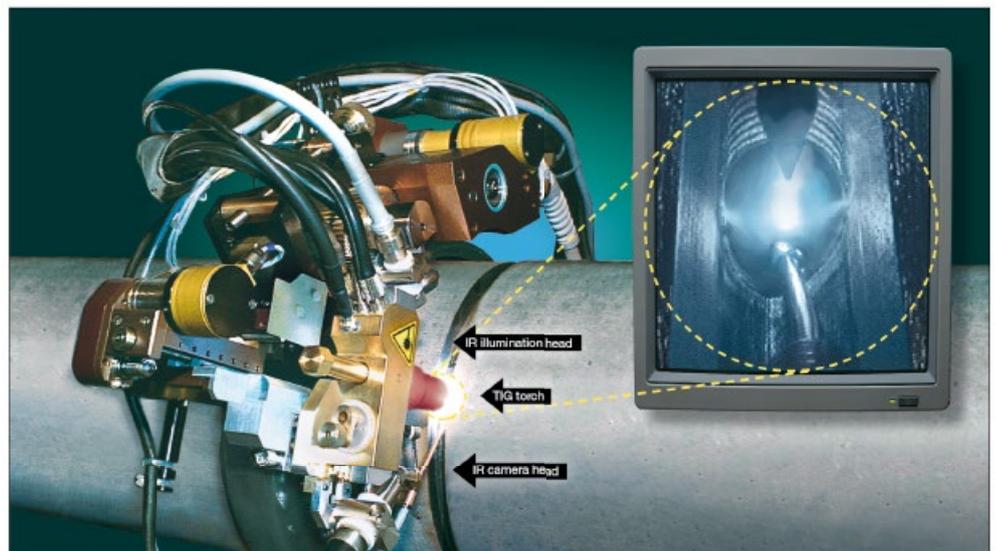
Arc and laser welding monitor permits remote observation and control of arc and laser welding operations.
